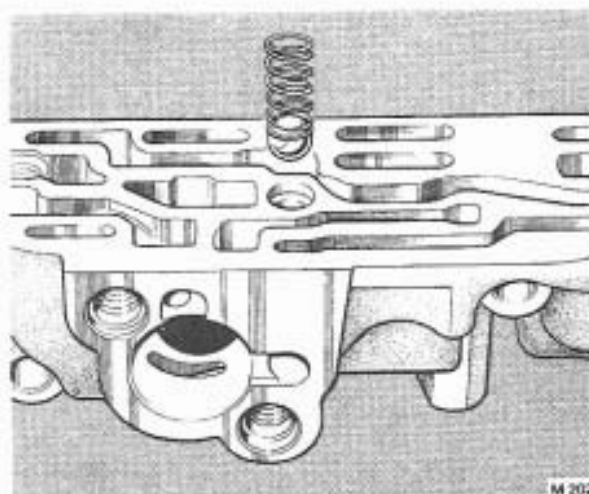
POSITIONING THE OIL CHECK BALL VALVE
